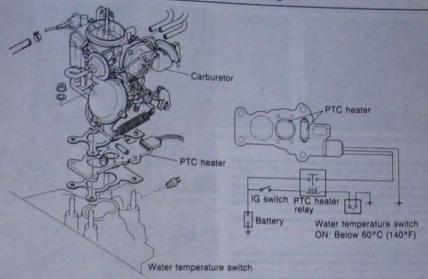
PTC heater system - Aisan carburettor (Sec 16)
